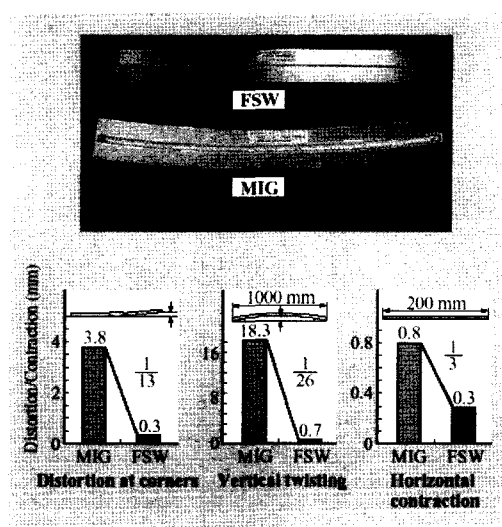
Welding deformation in FSW & GMAW (MIG) welding
